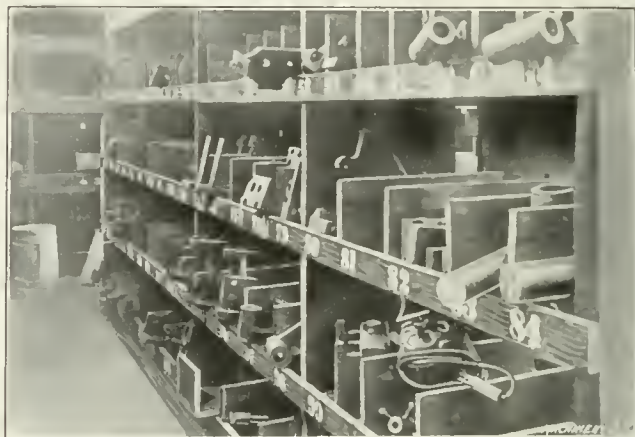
Numbered Jig Shelves for Holding Jigs and Tool Sets
